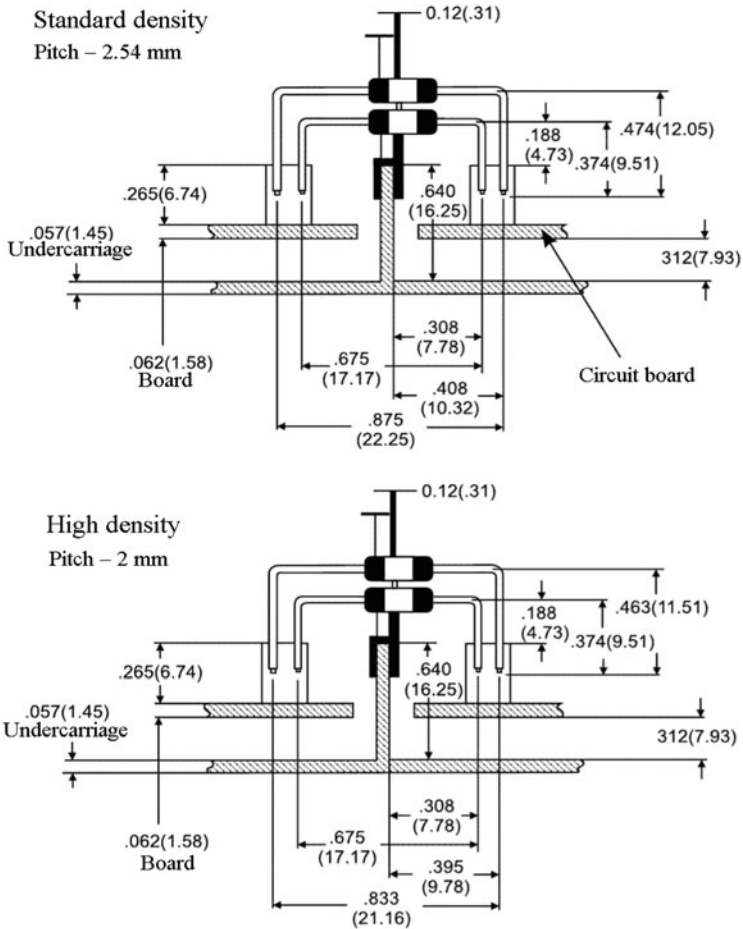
Drafts and typical examples of mounting of the Easy Mate Filter Plates assembly (printed board)
